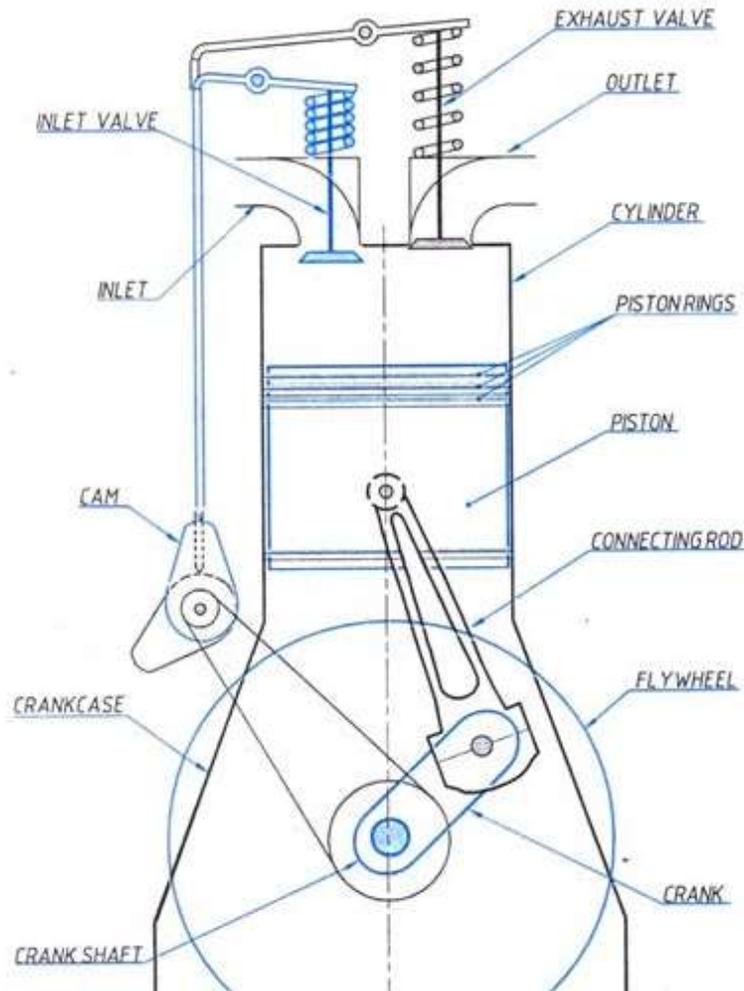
Cutaway Diagram of Internal Combustion Engine Cylinder²
